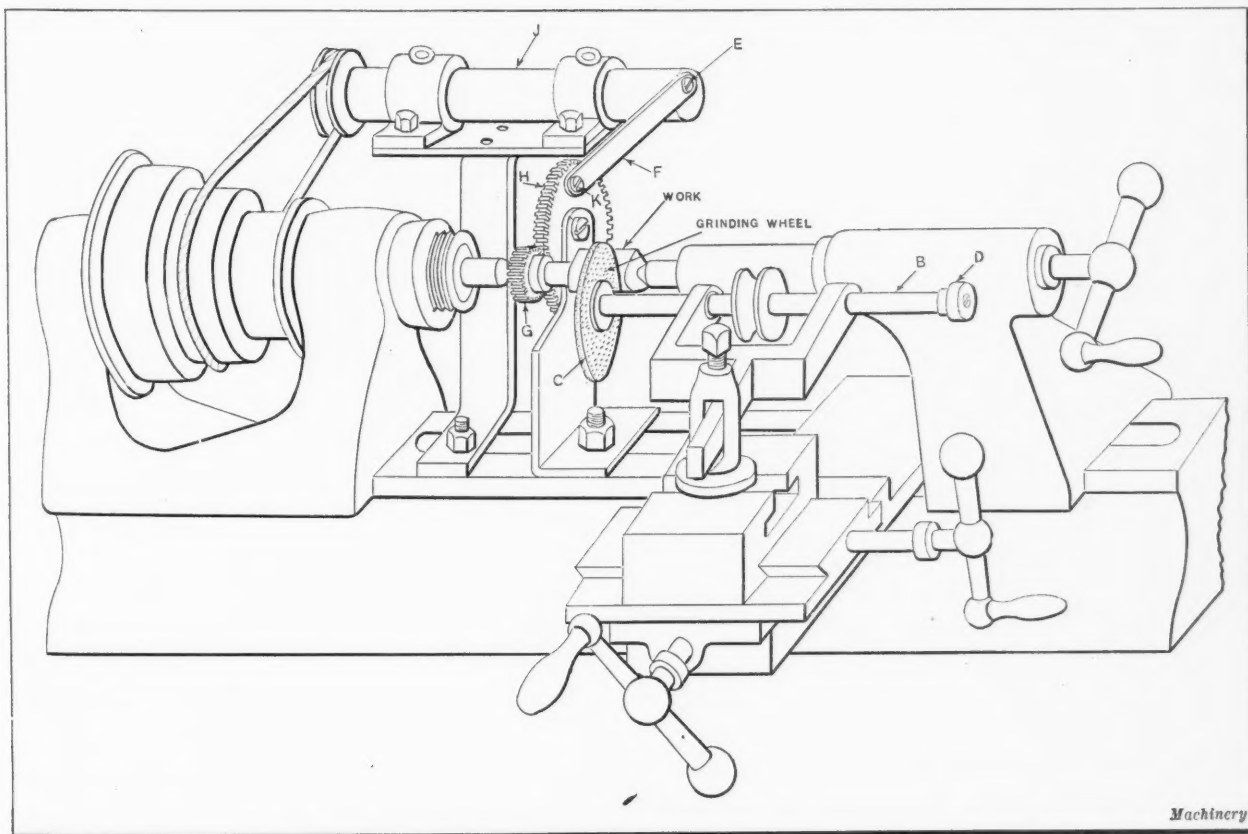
Work-oscillating Fixture and Attachment used for Arc grinding
